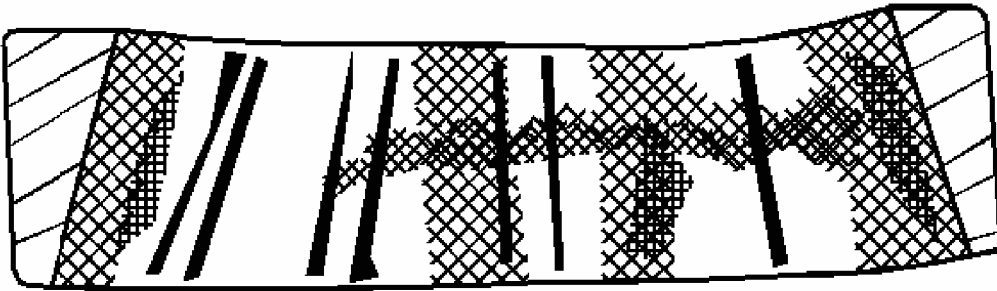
Inspecting Bearing Rollers & Races For Pitting, Grooves, Spalling & Excessive Wear
